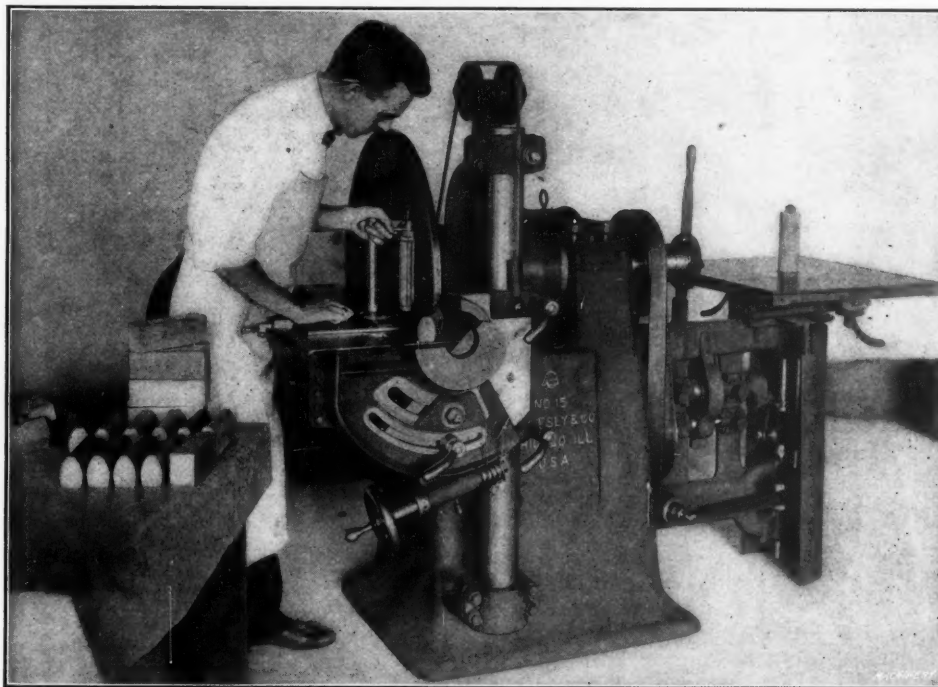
Use of Gear Tooth Fixture on Besly No. 15-30 C Patternmakers' Disk Grinder
